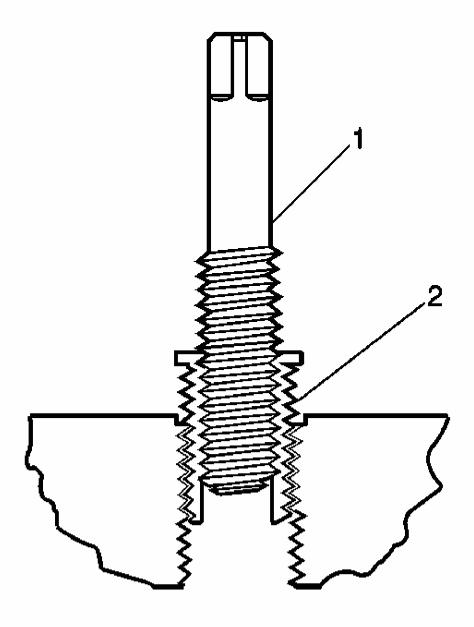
Installing Insert Into Tapped Bolt Hole Courtesy of GENERAL MOTORS CORP.
